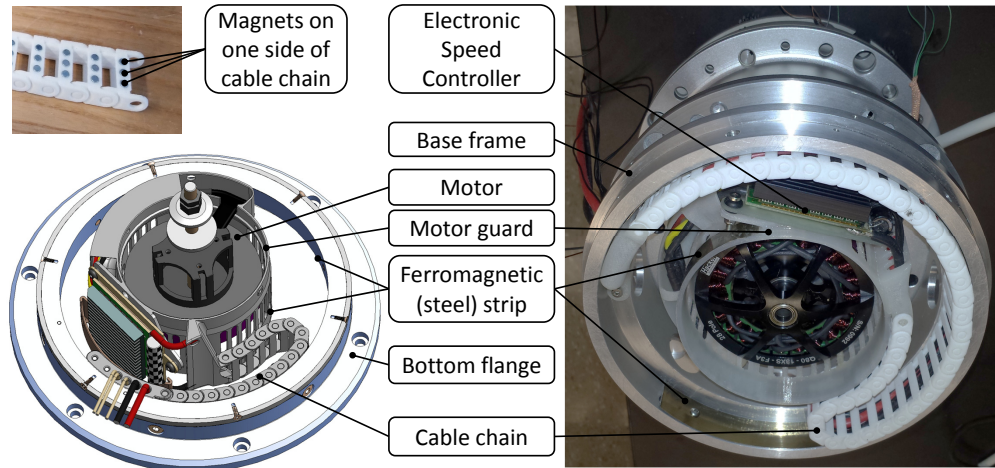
Cable chain for motor wiring (joint 1 rotation).
